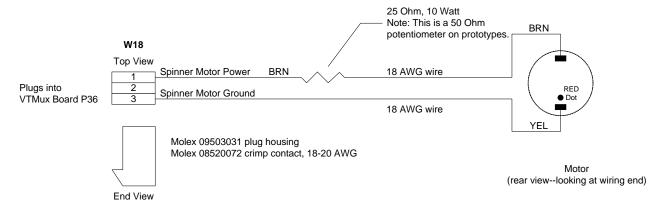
VTMUX BOARD P34 TO SPINNER MOTOR
